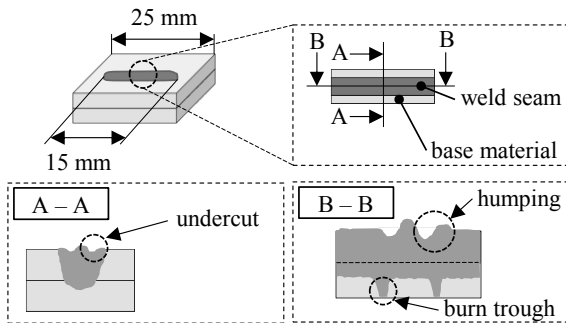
Sample geometry and major weld seam defects that occurred during the experiments.
